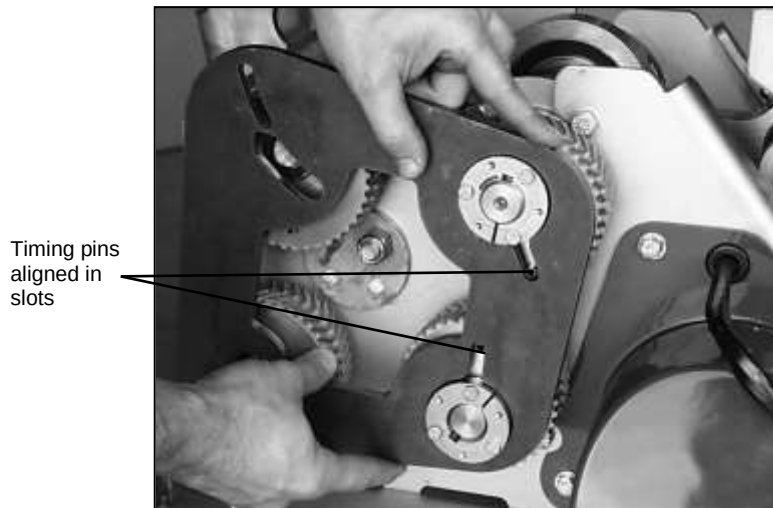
Timing the Crankshaft and Driveshaft Sprockets
